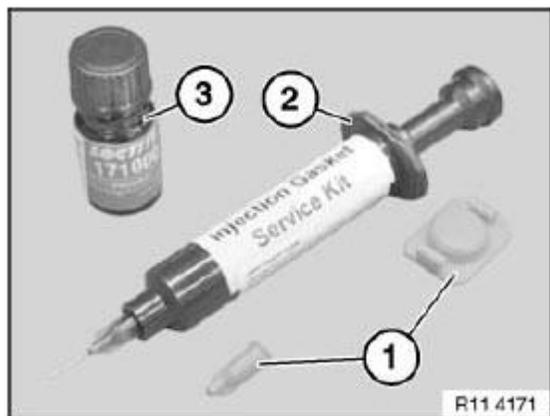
Identifying Injector, Sealing Compound And Bottle
